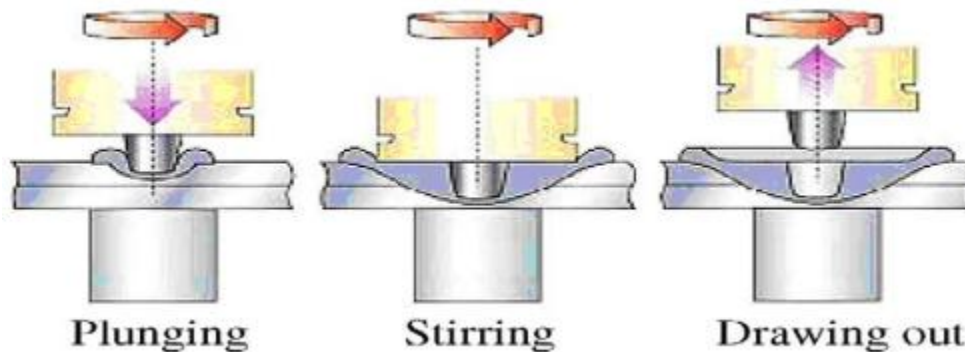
Schematic illustration of Friction Stir Spot Welding process
